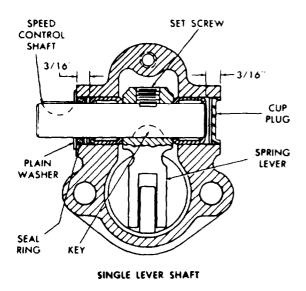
C-71. Cross Section of Governor Variable Speed Spring Housings
